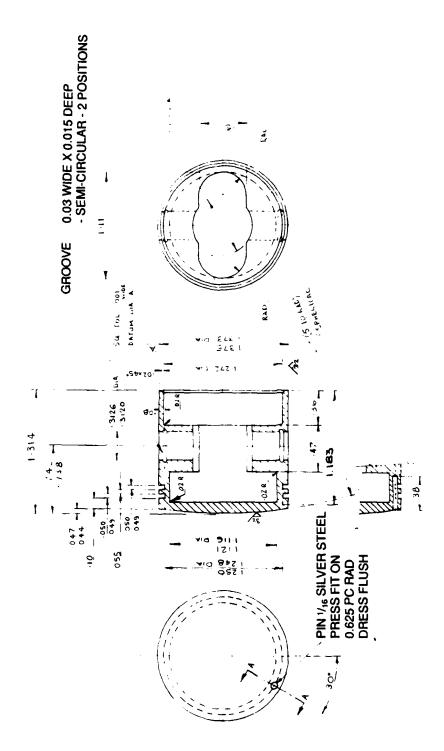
New aluminium alloy piston for Kolbo D238 engine
